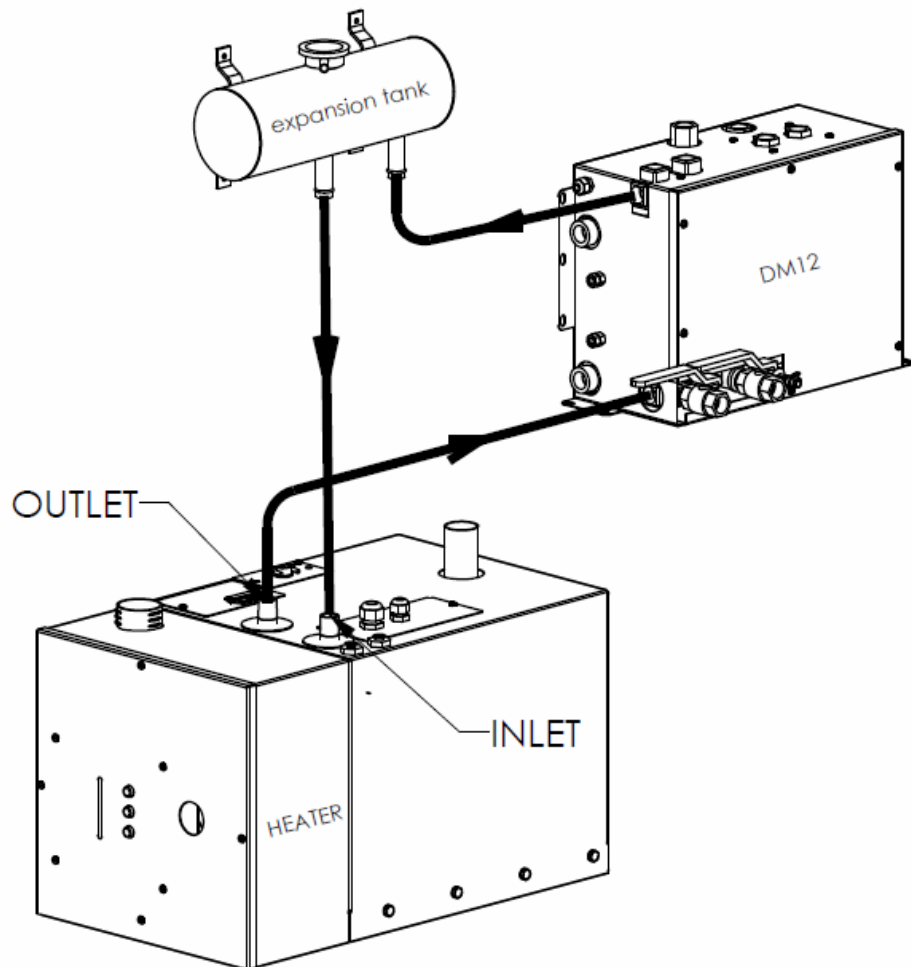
Engine Heat / Pre-heat System Plumbing.
